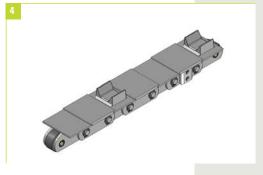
Spray booth chain with sealed bearing rollers to minimize surging
